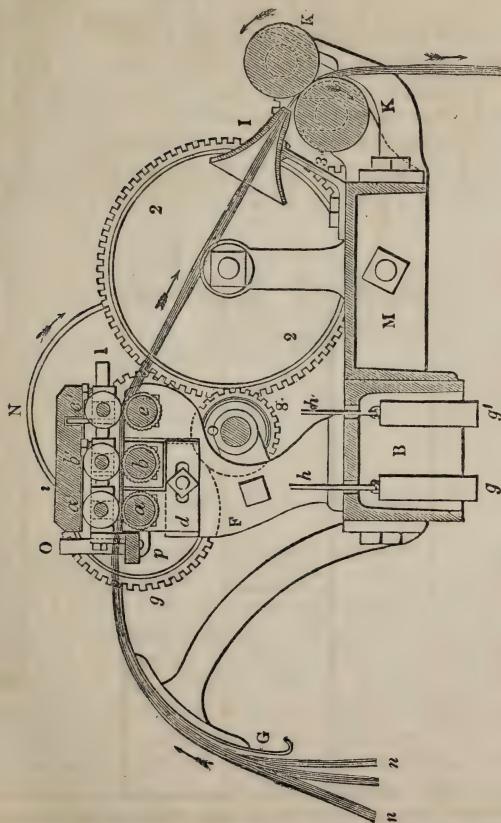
Drawing Frame; Section of the working parts. Scale, two inches to one foot.
